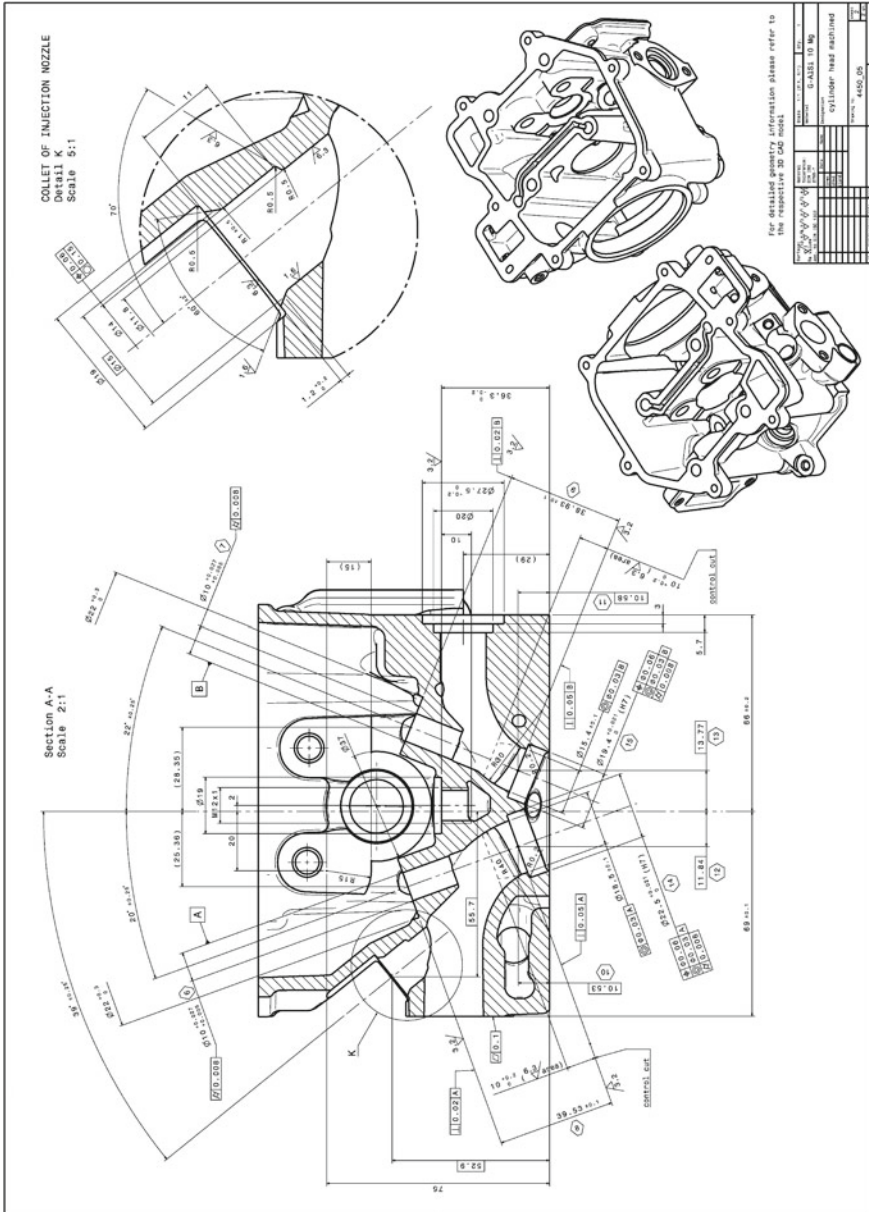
Detail Workshop drawing of a motorcycle cylinder head [8]
